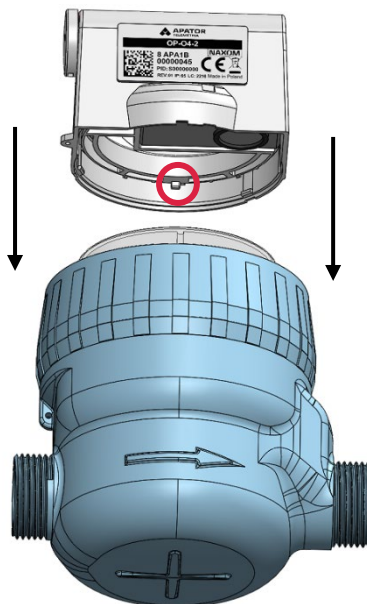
View of the OP-04-2 module, before mounting on the SV-RTK water meter.
